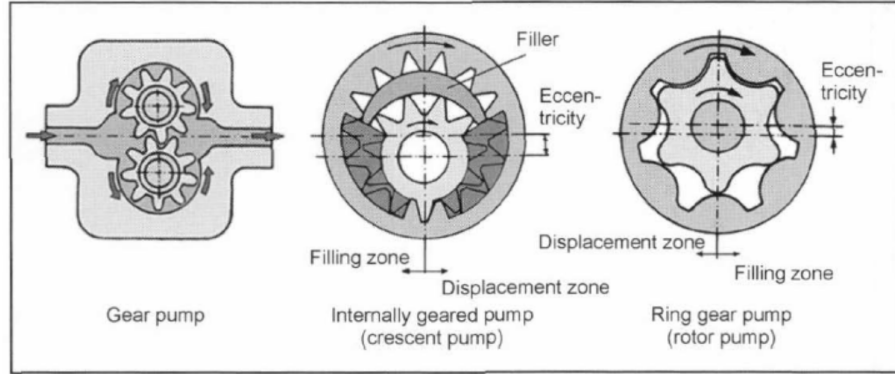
Conventional oil pump types [2]. External gear pump, internal gear pump and gerotor pump are shown from left to right.
